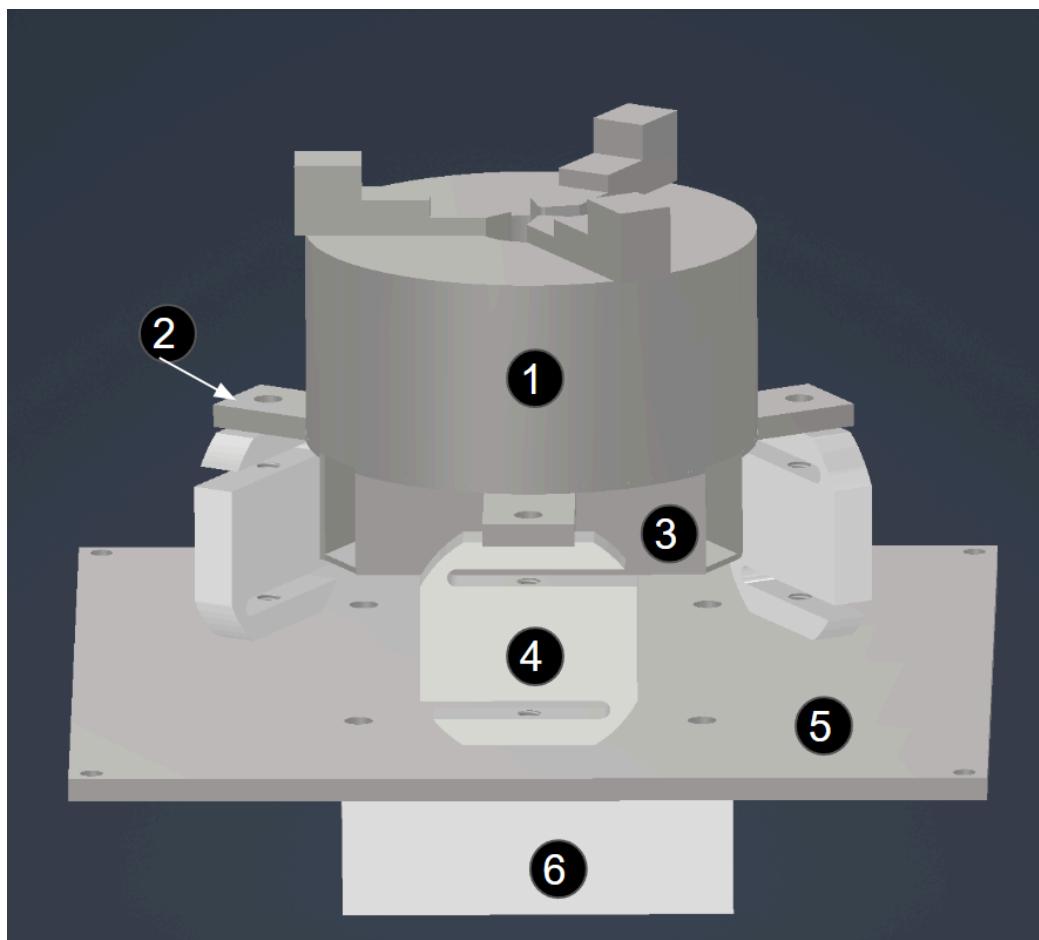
X: Motor Mount Assembly: 1.Lathe chuck 2.Load cell spacers 3. Ejection catch
